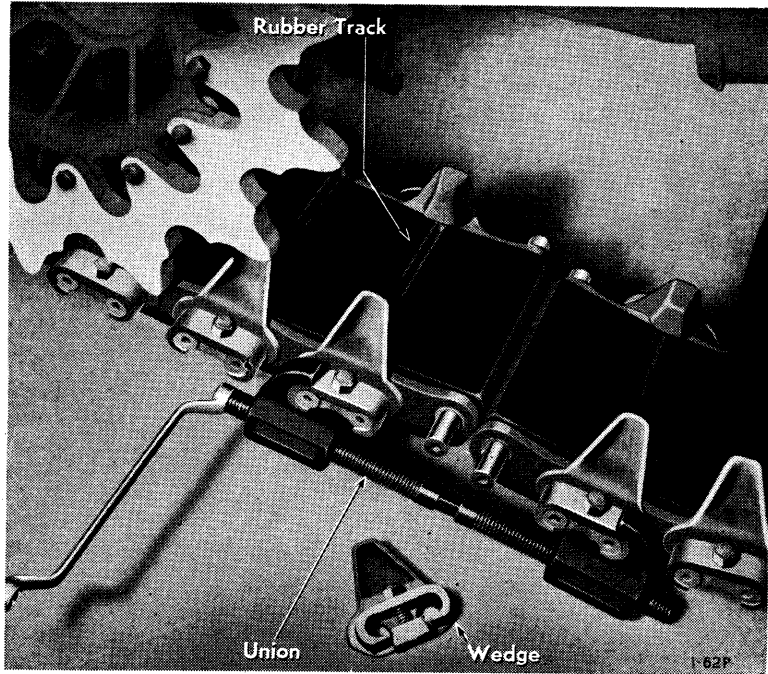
Turnbuckle service tool in position. Track horn is shown in the foreground, complete with wedge, bolt and nut
